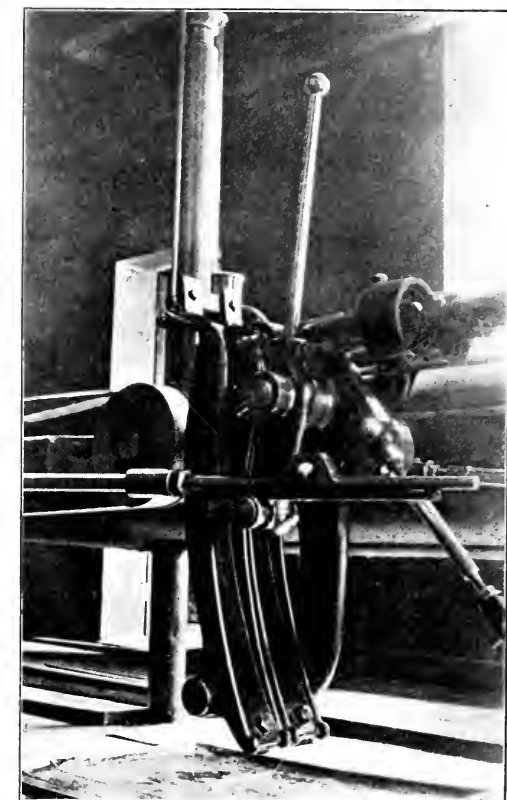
A CLOSER VIEW OF THE VALVE GEAR. THE ECCENTRIC ROD IS UNHOOKED.
